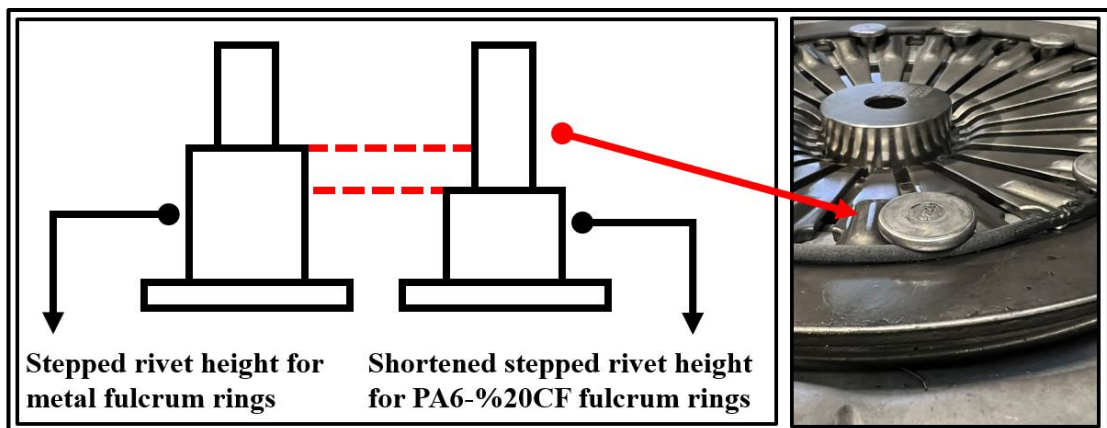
Shortened stepped rivet for assembling PA6 - %20CF fulcrum rings
